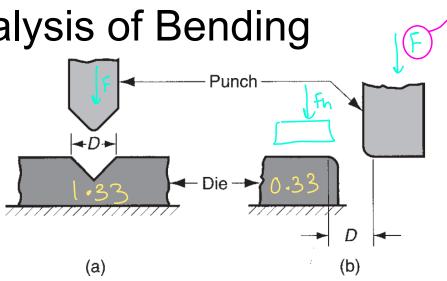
Die opening dimension *D*: (a) V-die, (b) wiping die.
